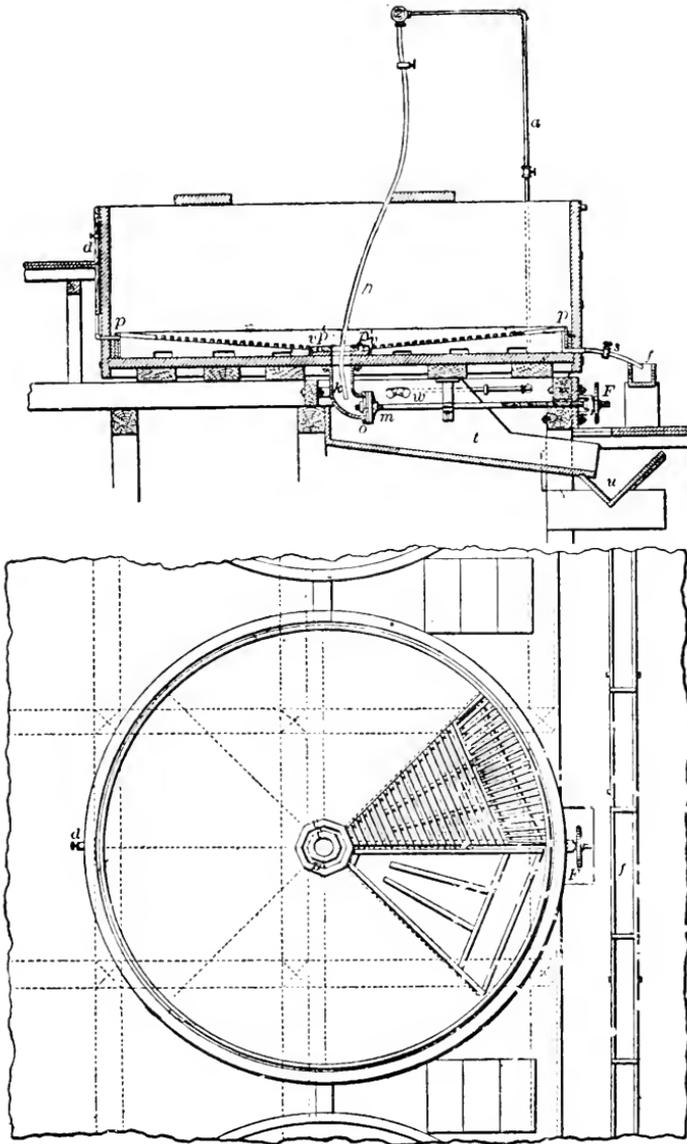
LEACHING VAT, WITH SLICING ARRANGEMENT (PLAN AND SECTION).
